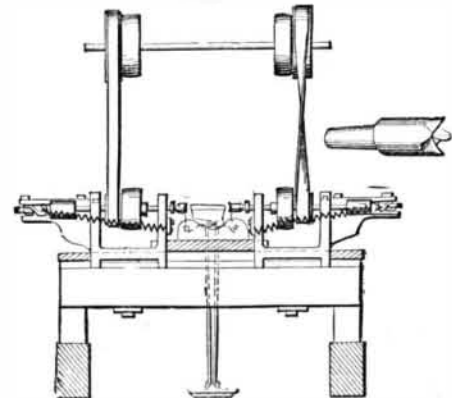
is a machine for riveting hinges. Peculiarly shaped revolving milling tools spread the pintle when forced against it, and form the head
